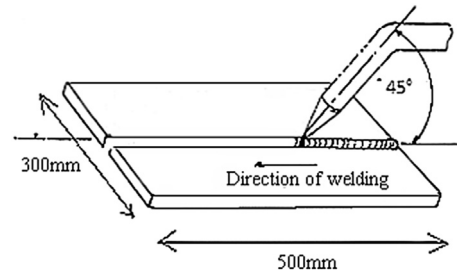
Schematic diagram of joint geometry and plate dimensions.
